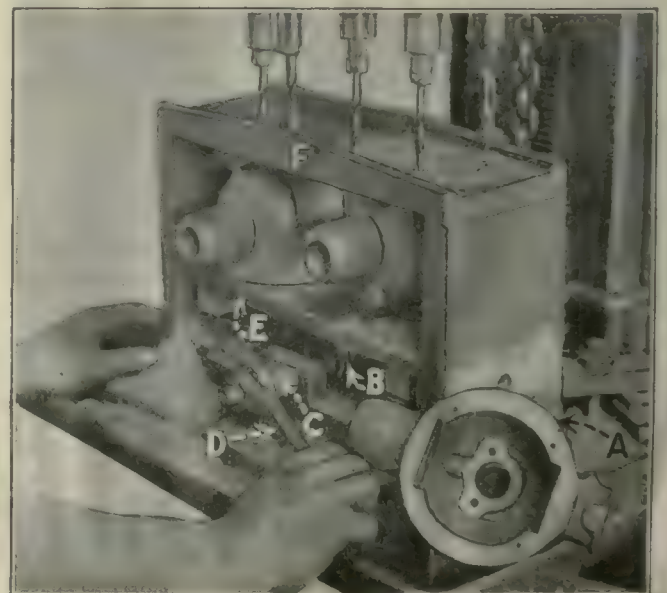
DOUBLE JIG CLAMPING BY CAM
